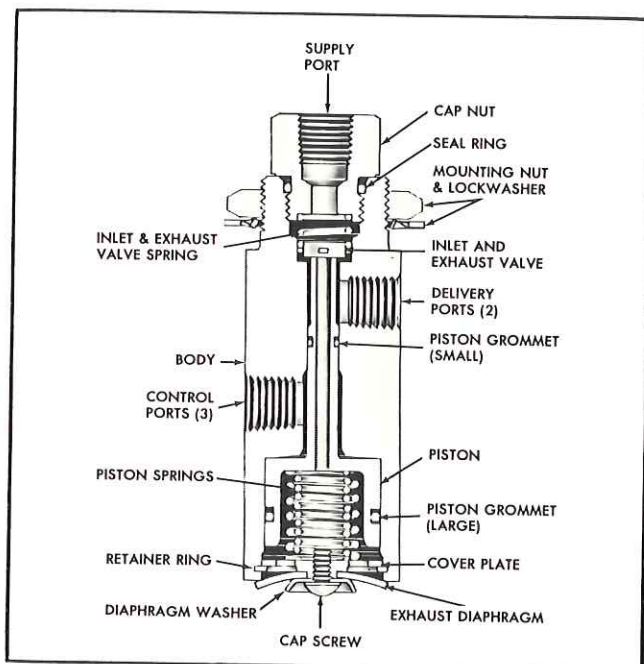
Inversion Valve Assembly—(Cross-Section)
